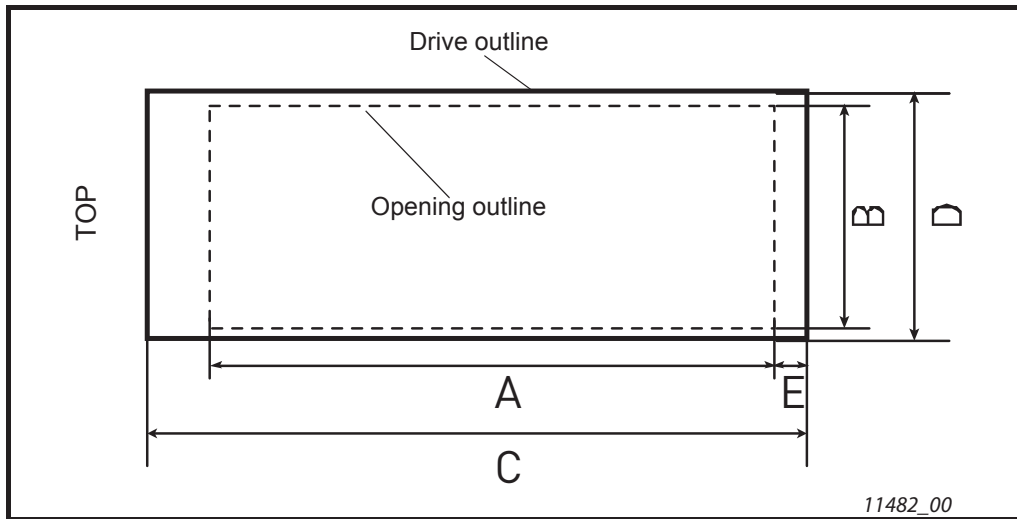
Flange mount cutout dimensions for MR7 to MR9
